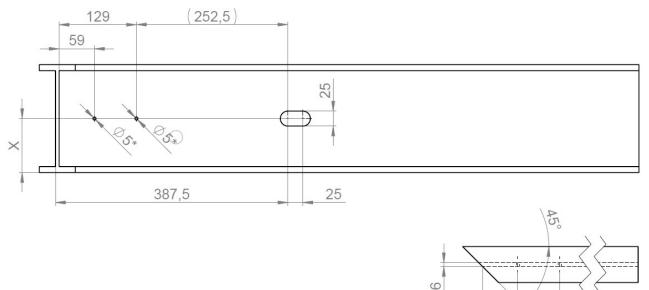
Drill hole positions for end feed with single expansion unit with aluminium overrun cap (45° cut on long side of substructure (support structure))
